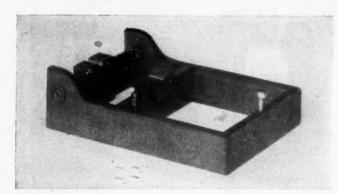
Close-up of wooden frame in which rotor is mounted shows relative location of bearings and fulcrum
